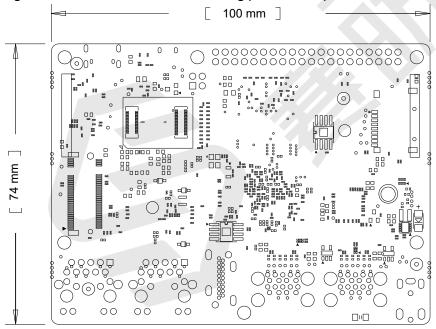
VisionFive 2 Mechanical Drawing (Bottom View)
